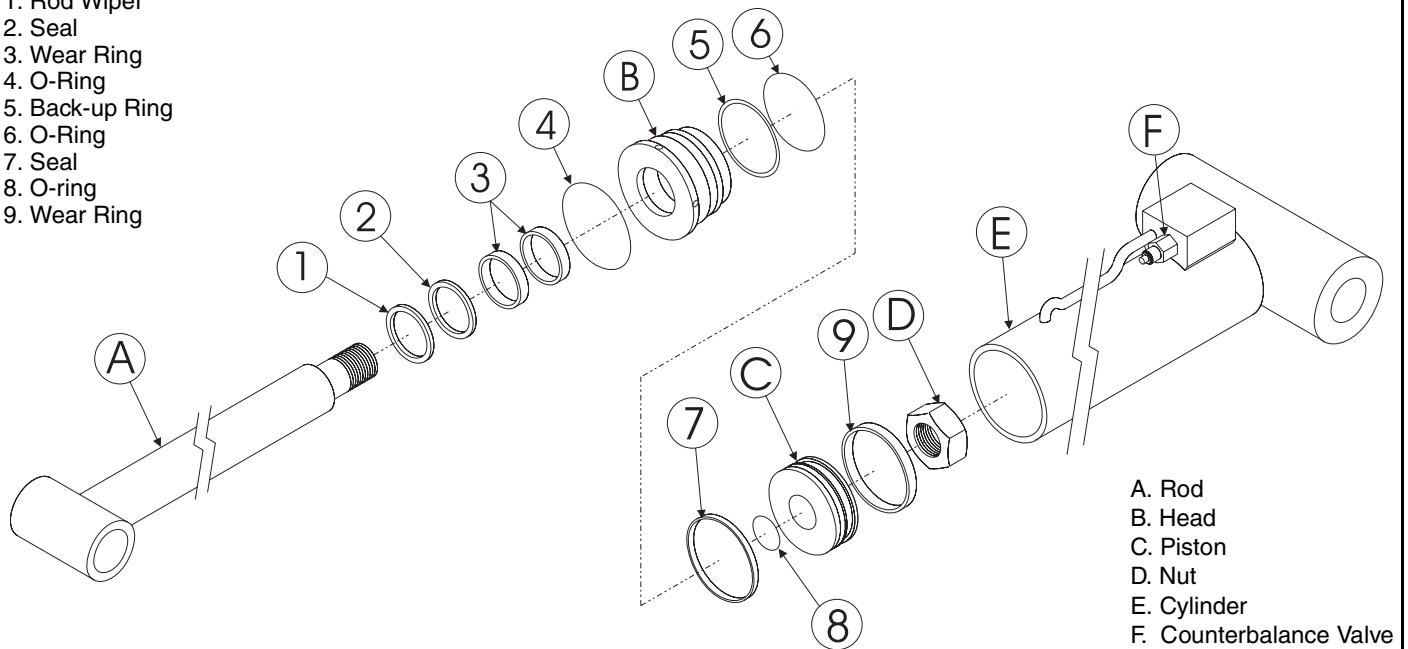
Riser Cylinder (S/N 1109 - Current)
